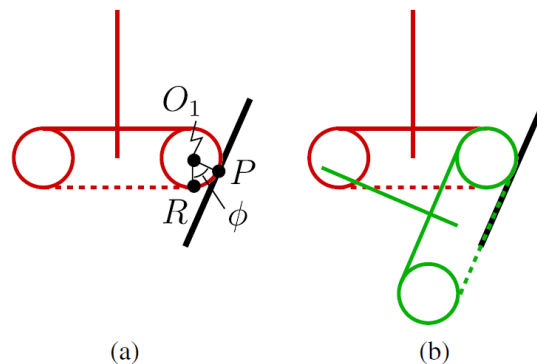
Tool can be rotated by a maximum angle of ϕ without causing gouging. (a) unrotated tool; (b) tool after rotation of ϕ (green), the maximum rotation without gouging, the flat bottom of the tool aligns with the plane of the facet [65]
